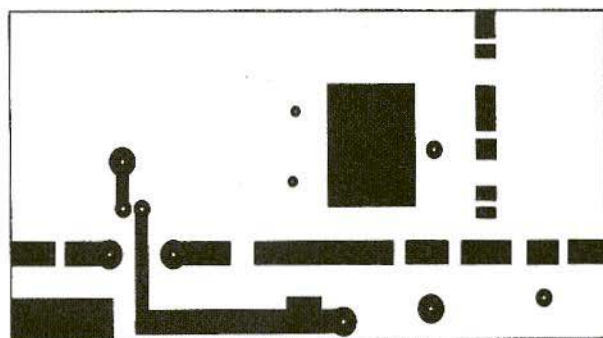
Harmonic mixer PCB layout. True size 71 mm x 35 mm
